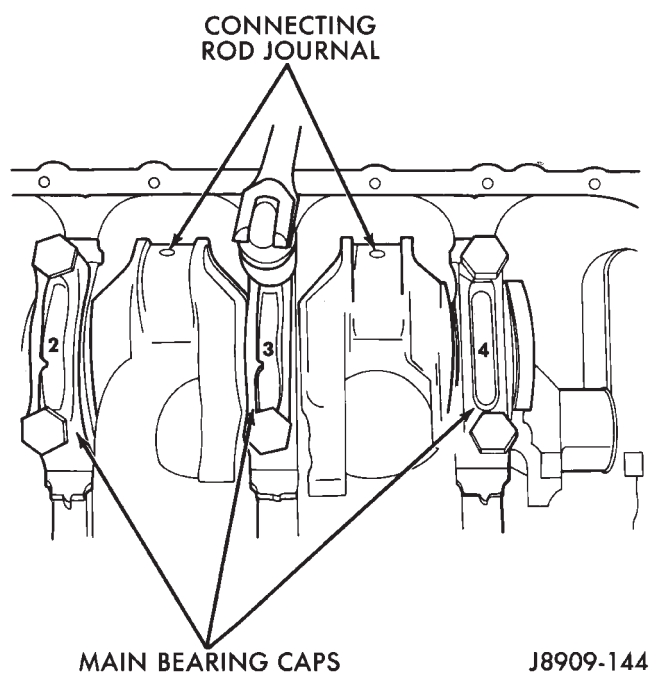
Removing Main Bearing Caps and Lower Inserts
